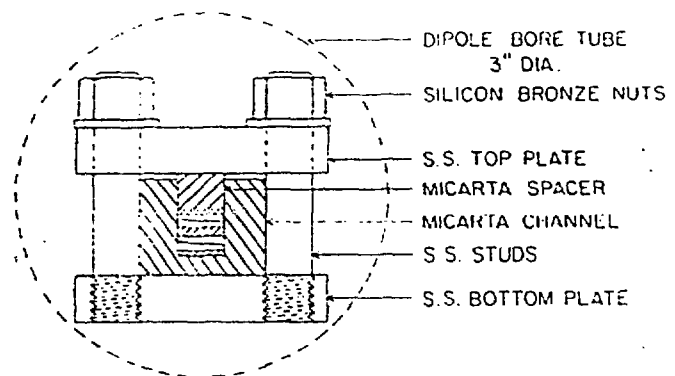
Schematic of the mechanical assembly and electrical wiring.
